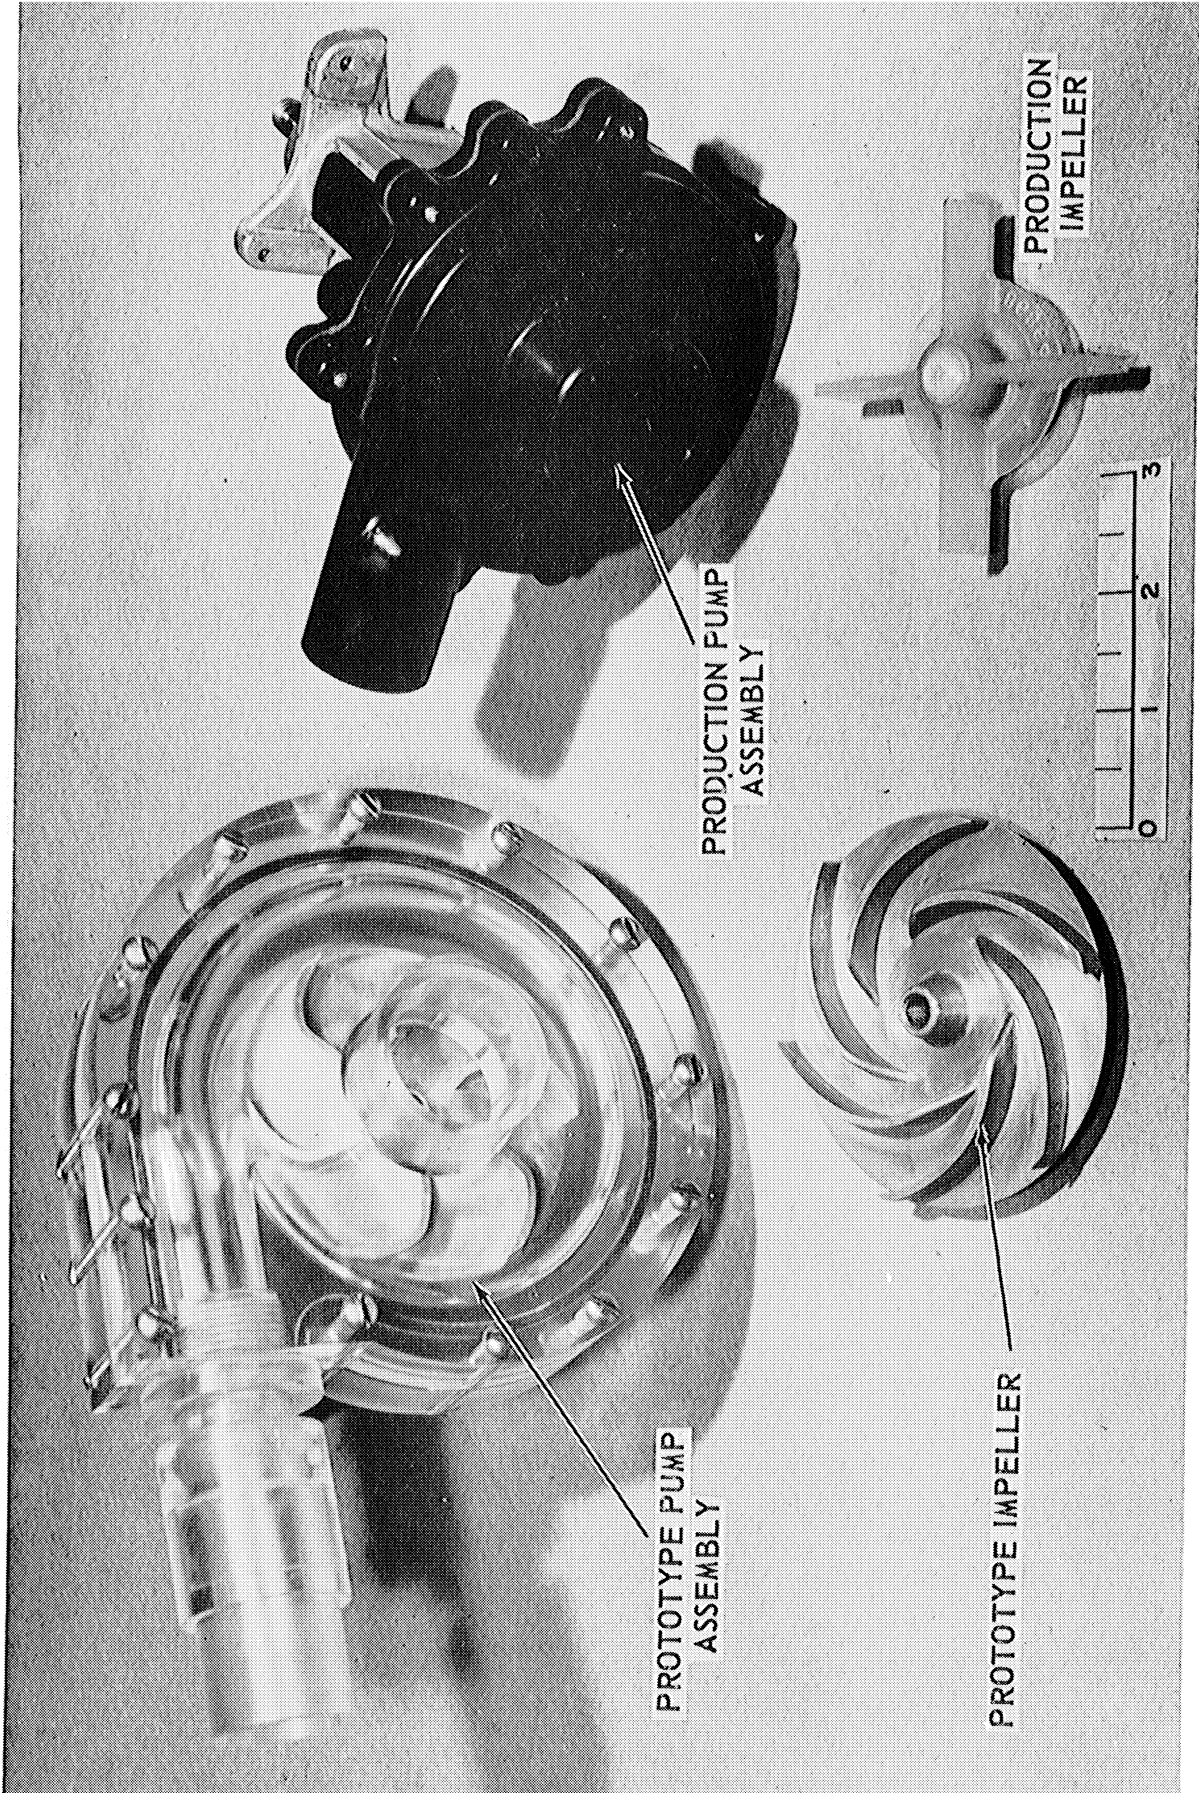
A. Comparison of prototype and production pump assemblies and impellers.
